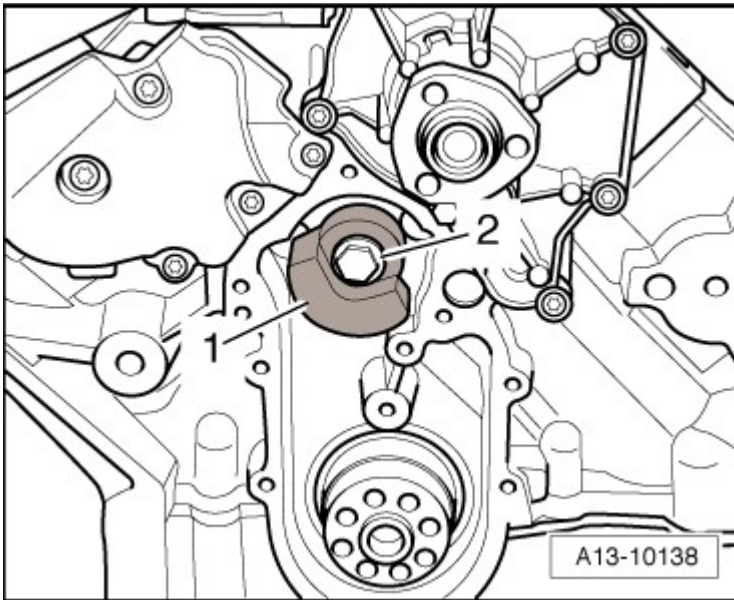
Identifying Balance Weight -1- And Bolt -2-
